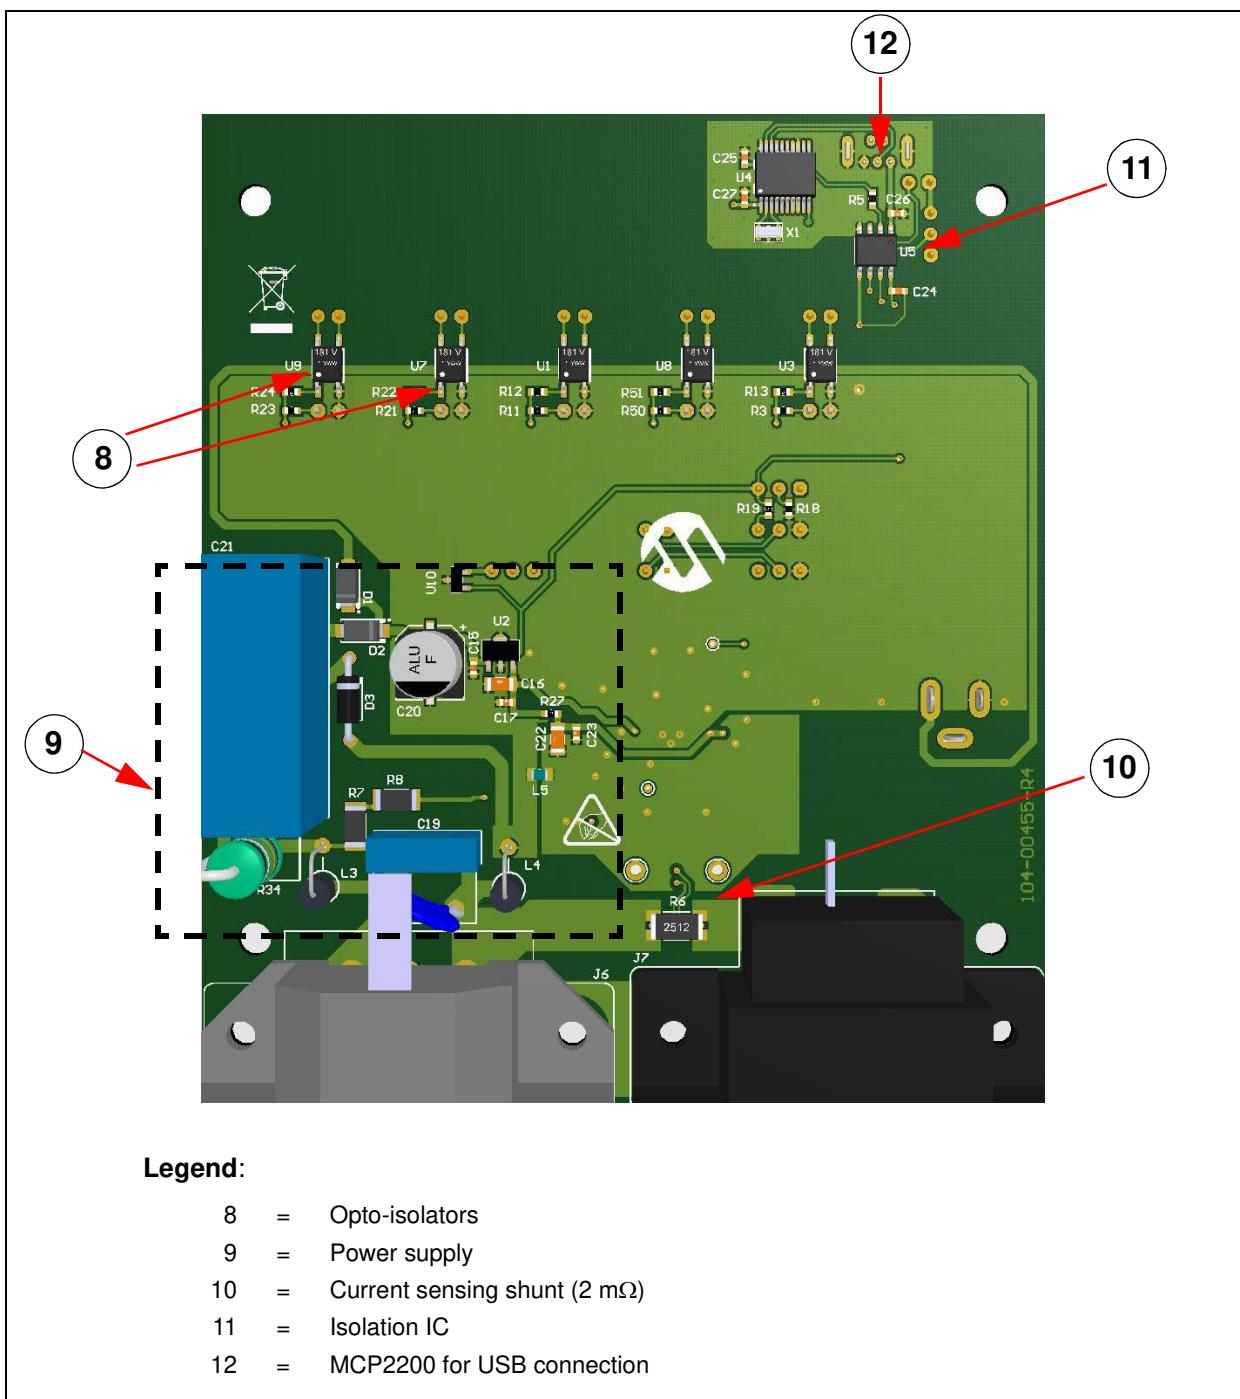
MCP39F501 Power Monitor Demonstration Board Bottom View – Hardware Components.
